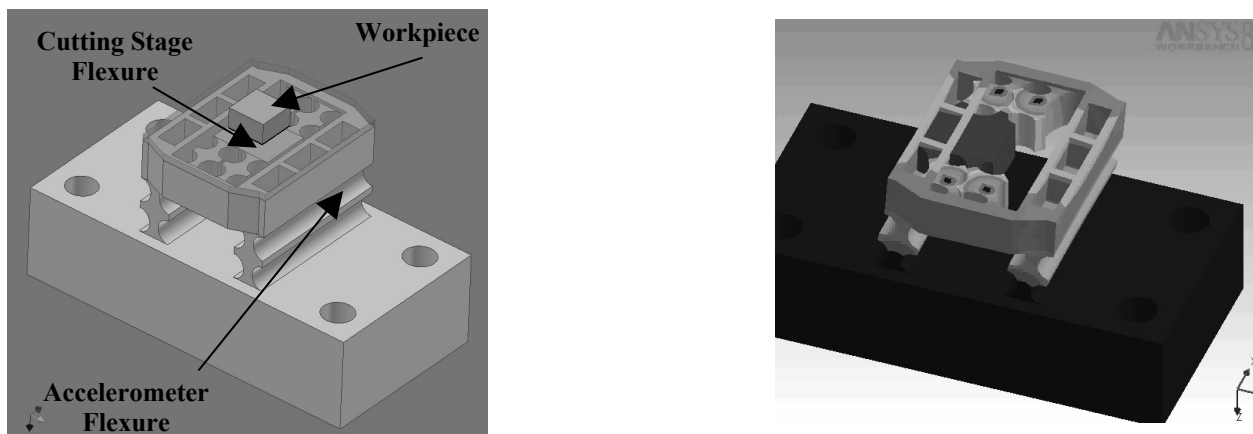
2DOF flexure design; the workpiece flexure is carried on the accelerometer flexure
